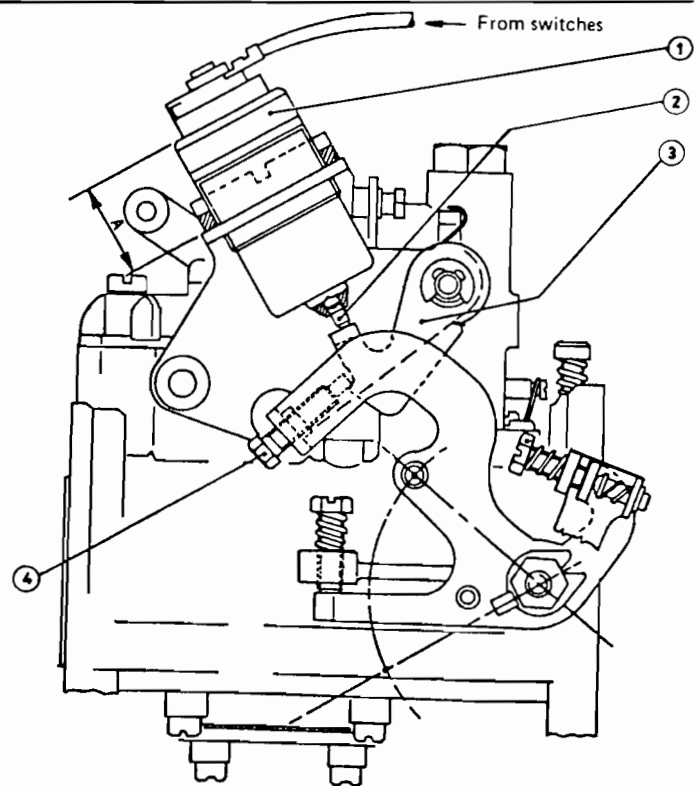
Location of idle solenoid valve on Dellorto DHLA 40H carburettor (Sec 5)
